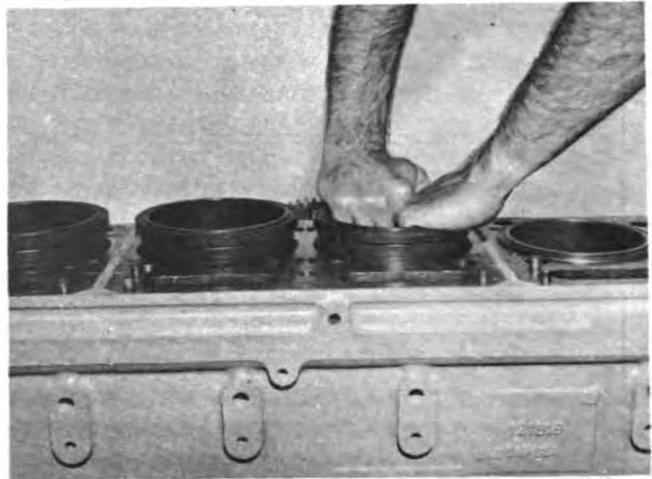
(N114106). Use A Quick Push To Put The Liner Into The Bore.
